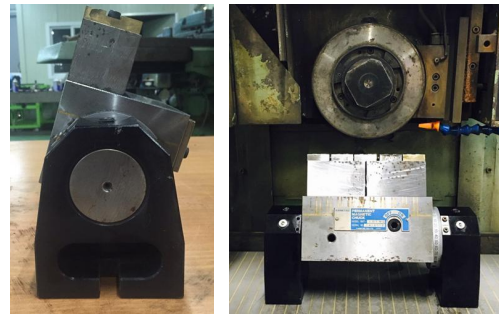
Rotary type electro-magnetic chuck for ELID grinding experiment of knife edge
